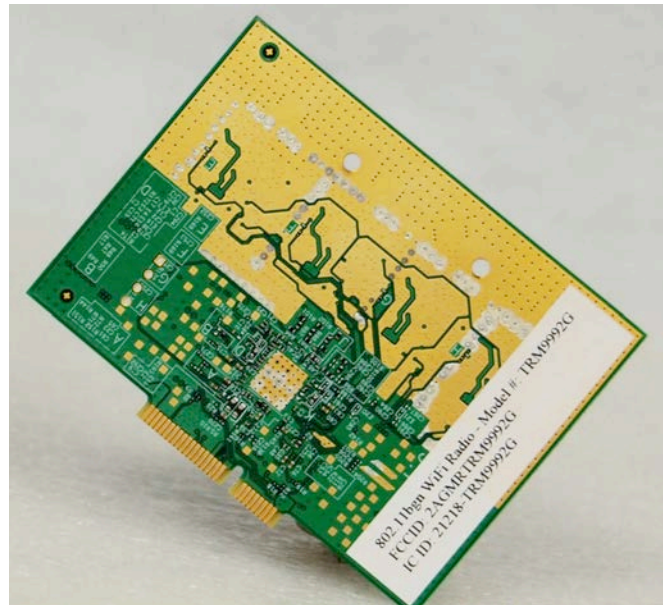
802.11bgn WiFi Radio Module Bottom View
